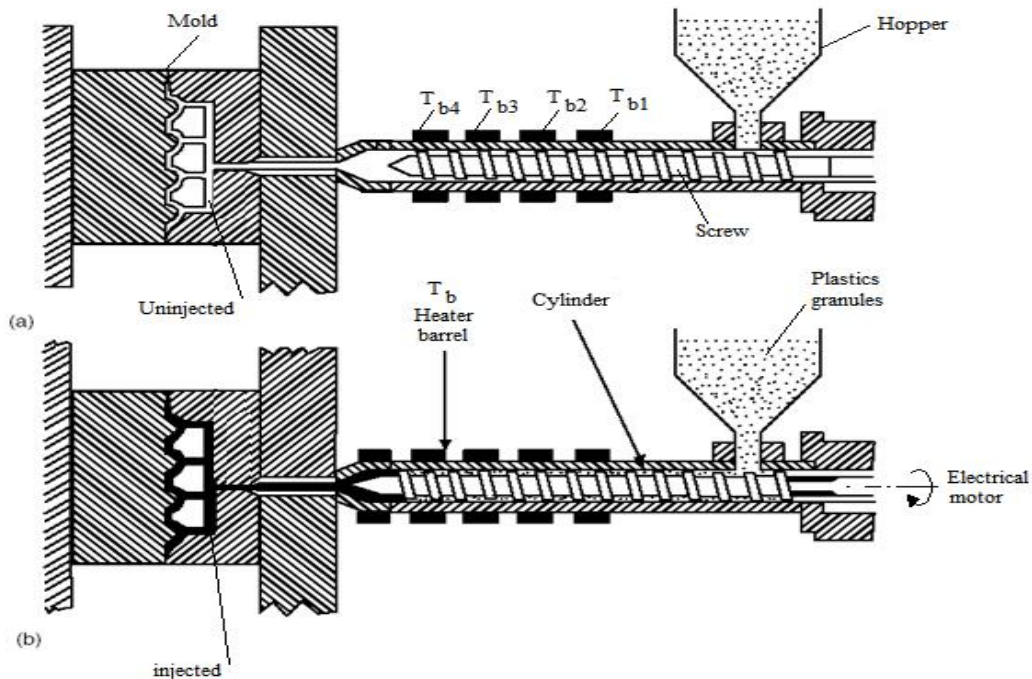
Screw injection molding machine, (a) in the backward position and (b) in the forward position.
